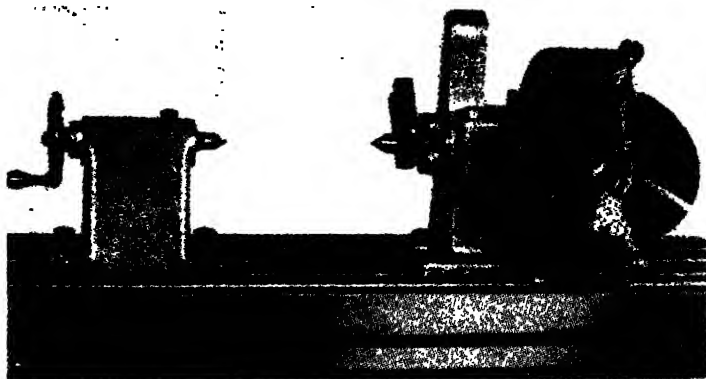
The gear-cutting attachment is used for spur-gear cutting and similar work. (*The Cincinnati Milling Machine Company*)
